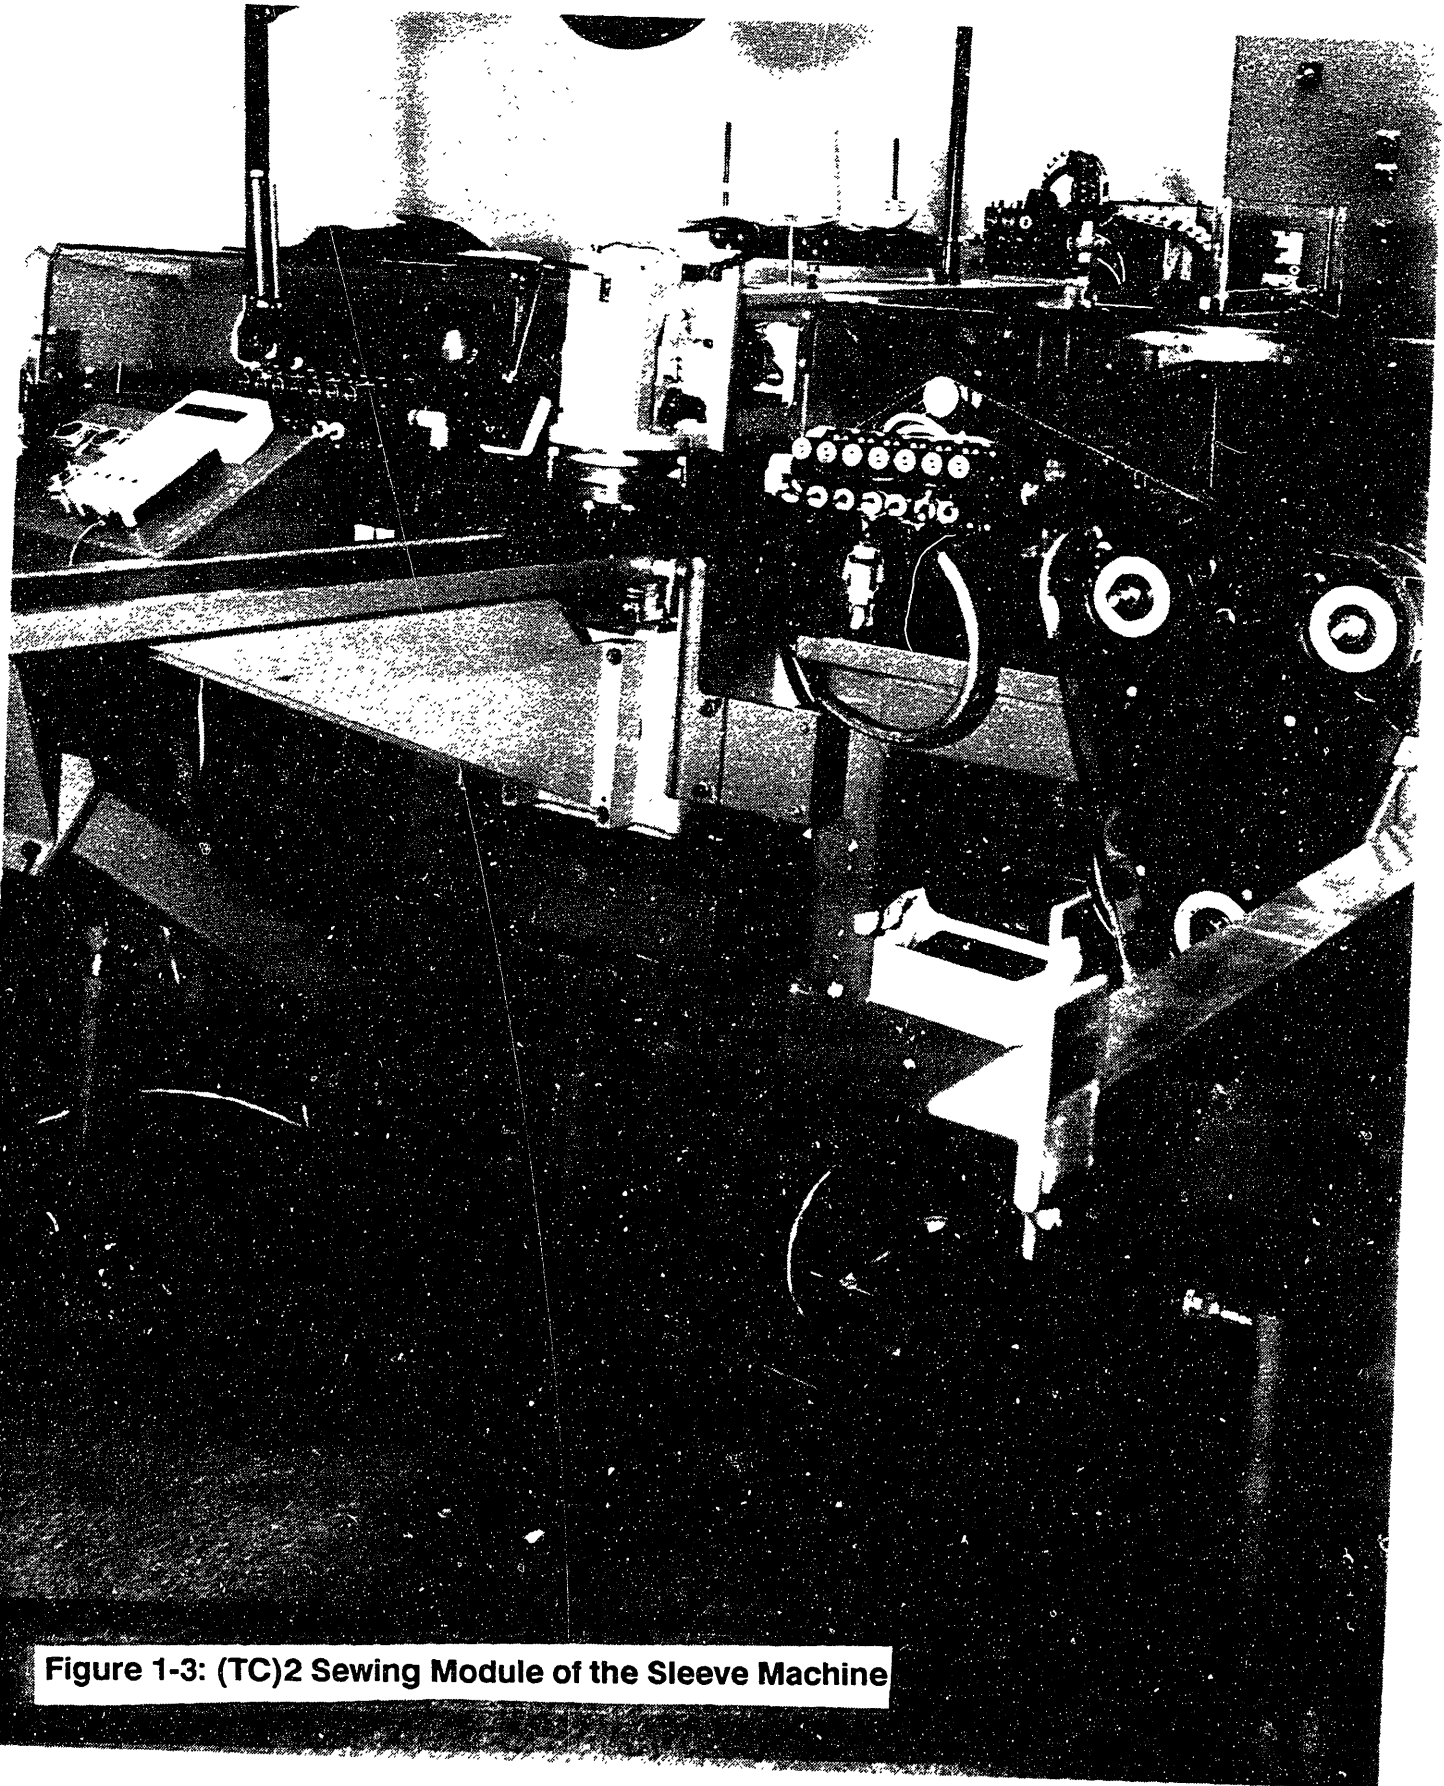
(TC)2 Sewing Module of the Sleeve Machine
